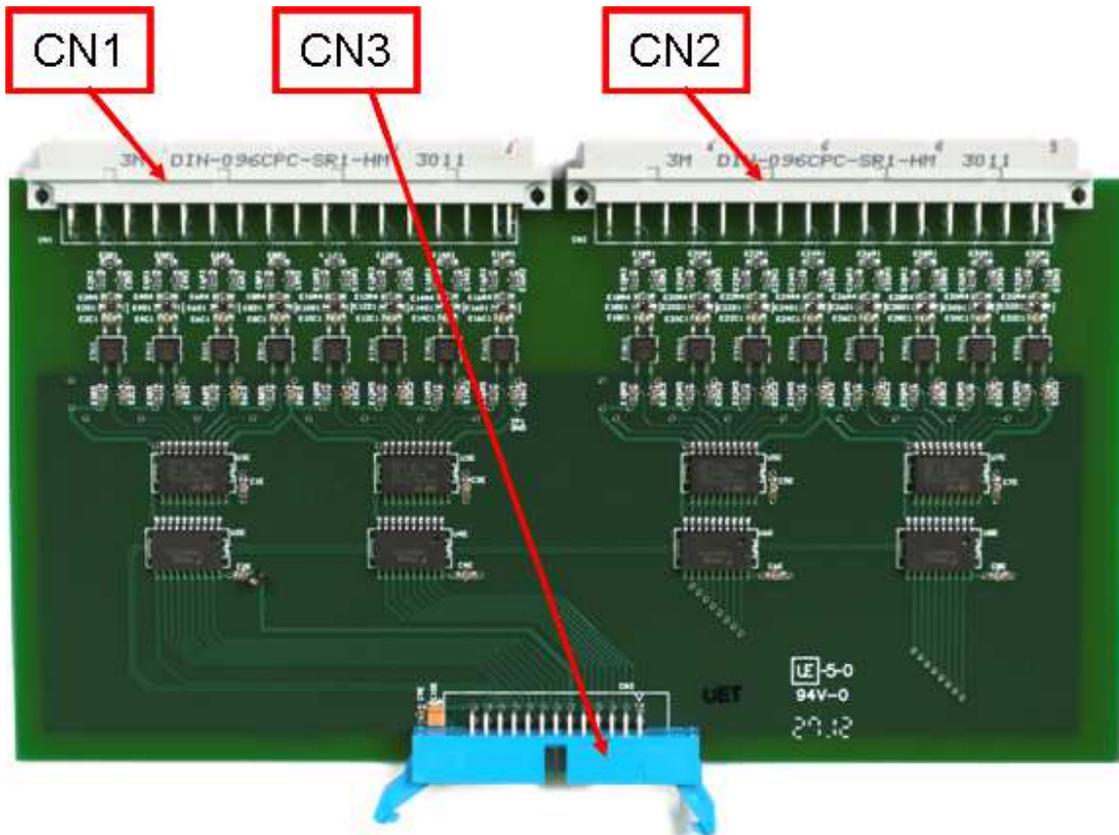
High-Voltage Digital Board (Dual Board Assembly) – Front Side
